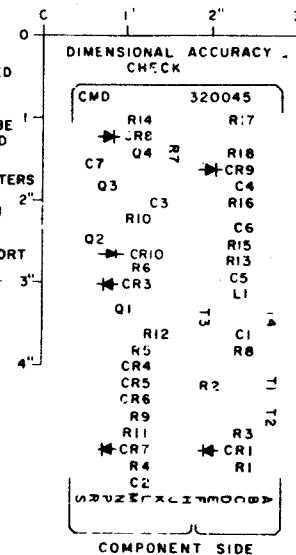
Clutch Magnet Driver 321991 (Sheet 2 of 2)
